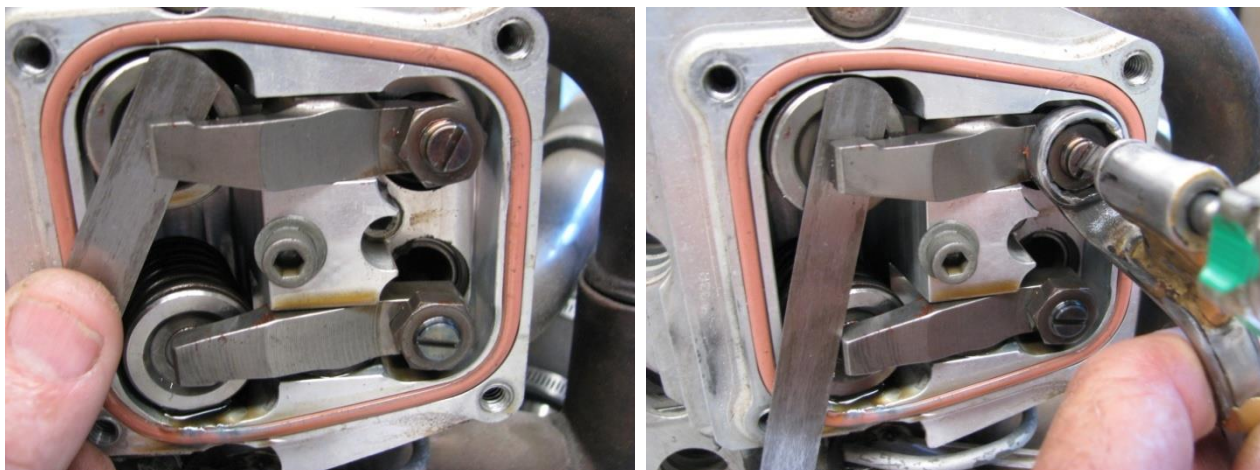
Valve Clearance Adjustment (Solid Lifter)
